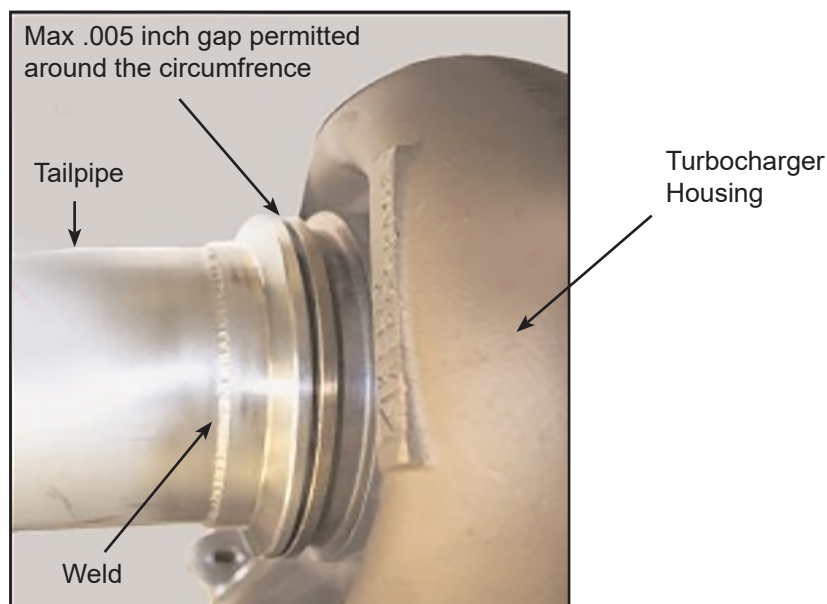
Exhaust Exit Flange and Exhaust Tailpipe Flange Inspection
